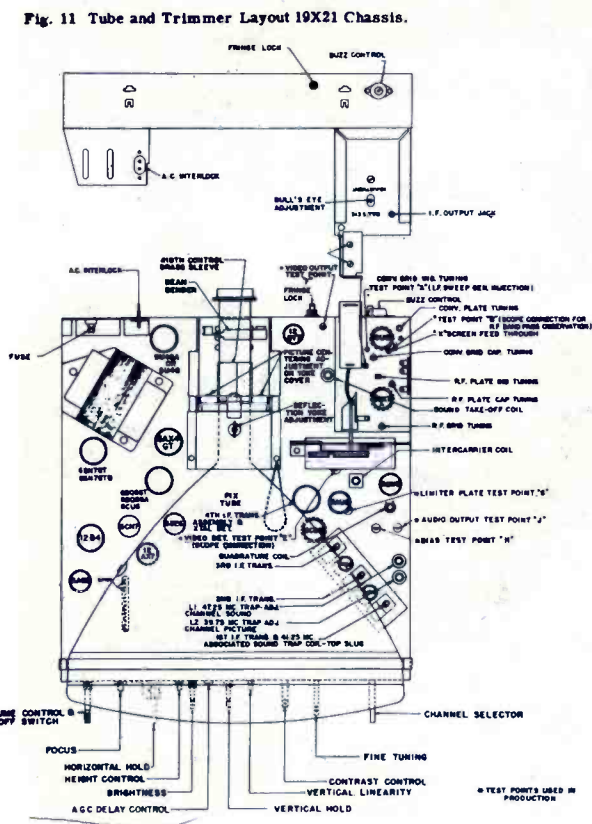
Tube and Trimmer Layout 19X21 Chassis.
